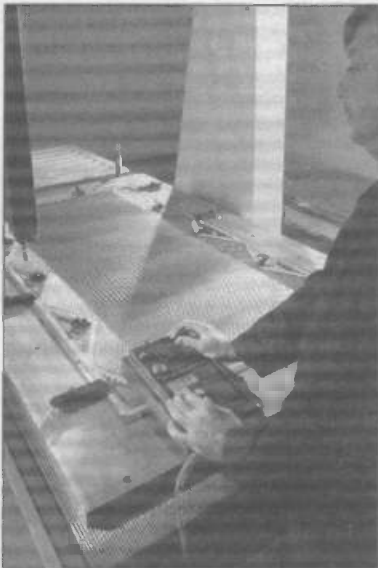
Machine used to manufacture separator plates for MCFC systems (Courtesy M-C Power Inc)
